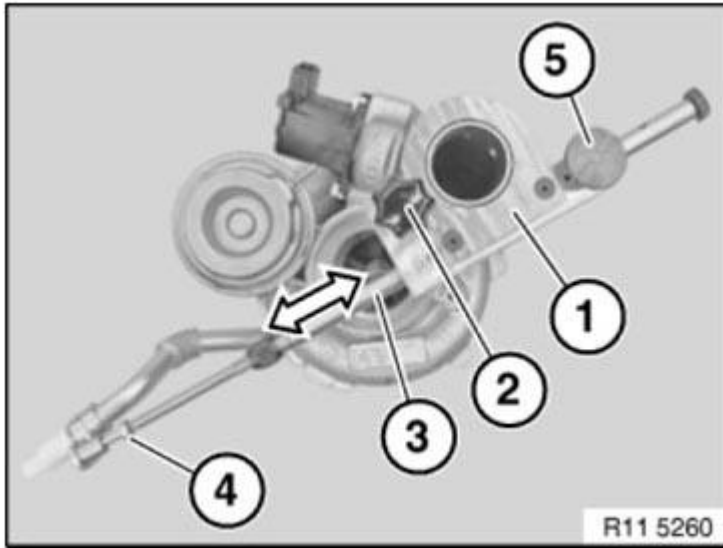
Sliding Screw Shaft Up To Mounting Bolt
